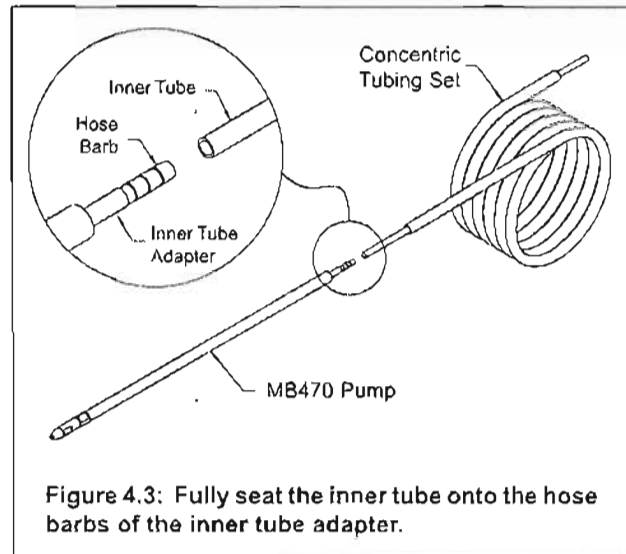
Fully seat the inner tube onto the hose barbs of the inner tube adapter.
